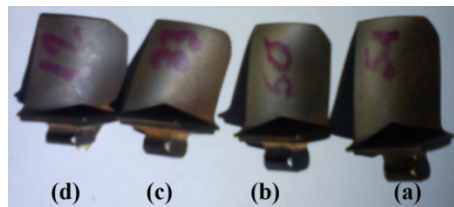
Compressor fins Eroded HP: 6th floor (a), 7th floor (b), 8th floor (c) and 9th floor
